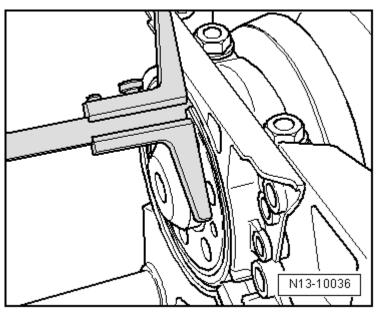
Identifying Installed Position Of Sensor Wheel On Crankshaft Is Exact
